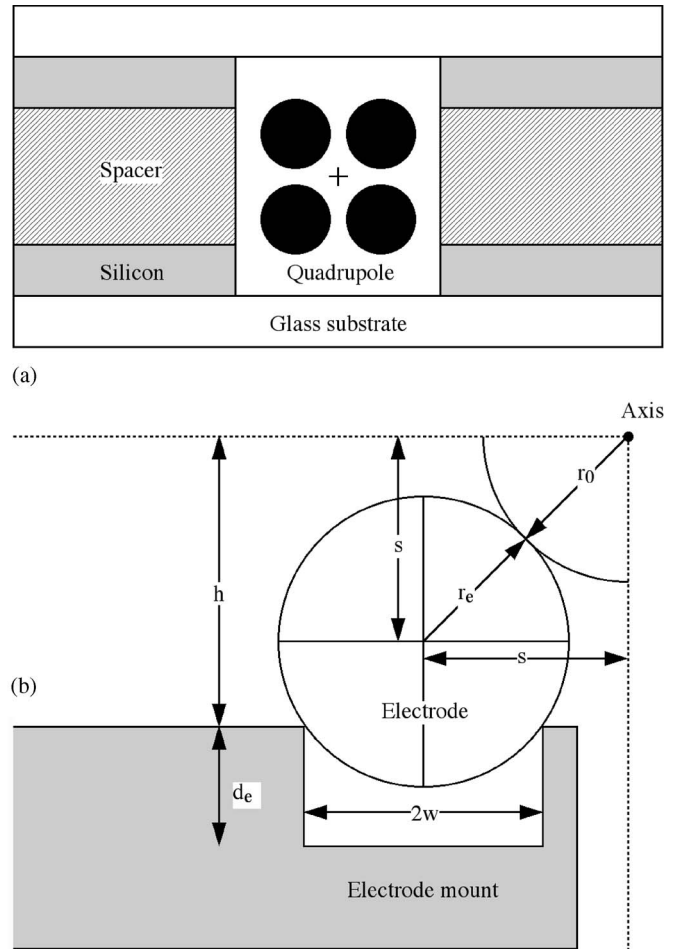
(a) Quadrupole assembly. (b) Geometry for calculation of rod mount design parameters.
